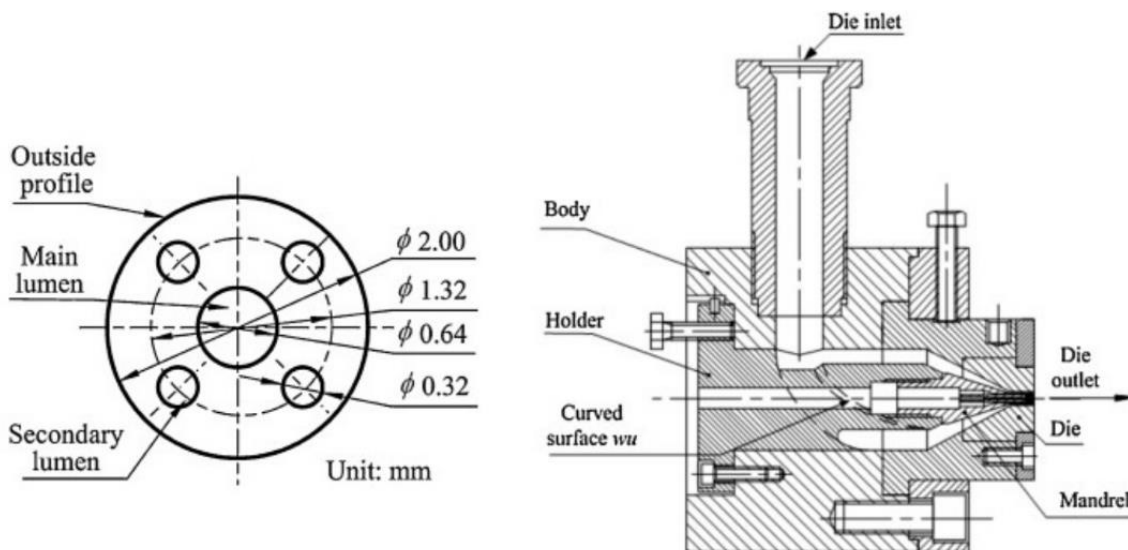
A drawing of the tube and die arrangement (courtesy Elsevier Publications – Jin, G., Wang, M., Zhao, D., Tian, H. and Jin, Y. (2014). Design and experiments of extrusion die for polypropylene five-lumen micro tube. *Journal of Materials Processing Technology*, 214(1), pp.50-59.)
